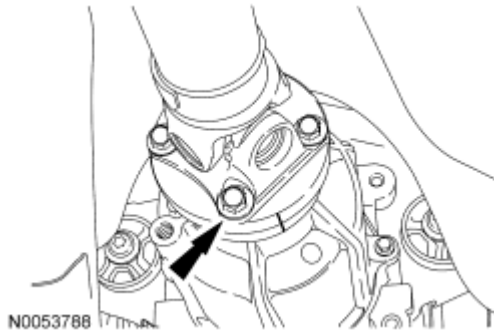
Locating Rear Driveshaft Universal Joint Flange Bolts
